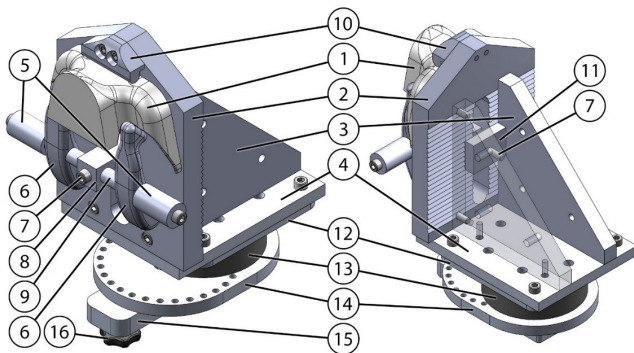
Holding device for upper jaw: (1) upper jaw, (2) surface plate, (3) support plate, (4) ground plate, (5) axle boxes, (6) clamping arms, (7) clamping bolt, (8) sliding block, (9) clamp axis, (10) front block, (11) clamping nut, (12) top plate of sensor build-up, (13) force/torque sensor, (14) rotation plate, (15) bottom plate, (16) locking bolt
